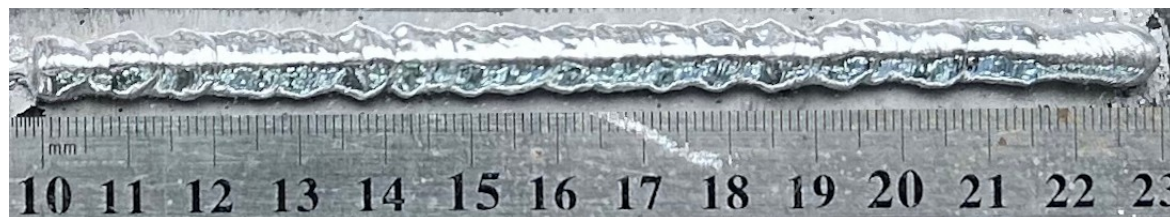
External appearance of the welding bead produced in the following mode:
